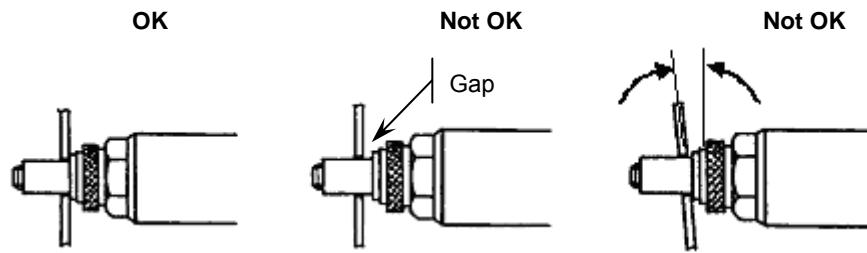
Proper insertion of POP NUT™ threaded inserts into an application
